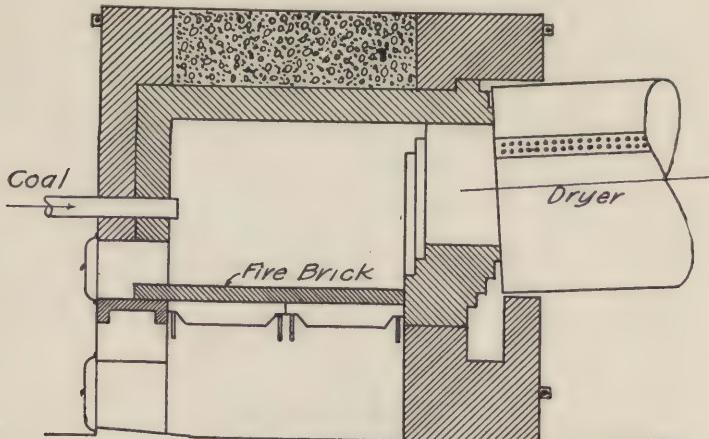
Method of installing pulverized coal firing in case of dryer previously fired by hand.
